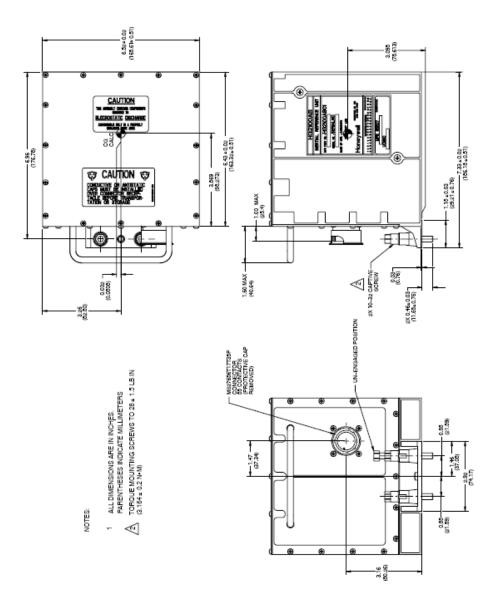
(1 of 2) IMU Type 21 Outline - Top, Side and Front Views
